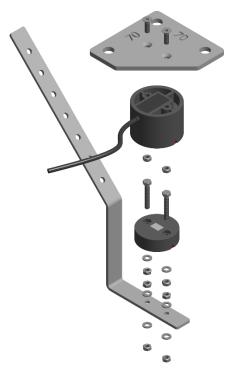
SCHEMATIC OVERVIEW OF WHEEL ANGLE SENSOR WITH MOUNTING BRACKET AND STRIP
